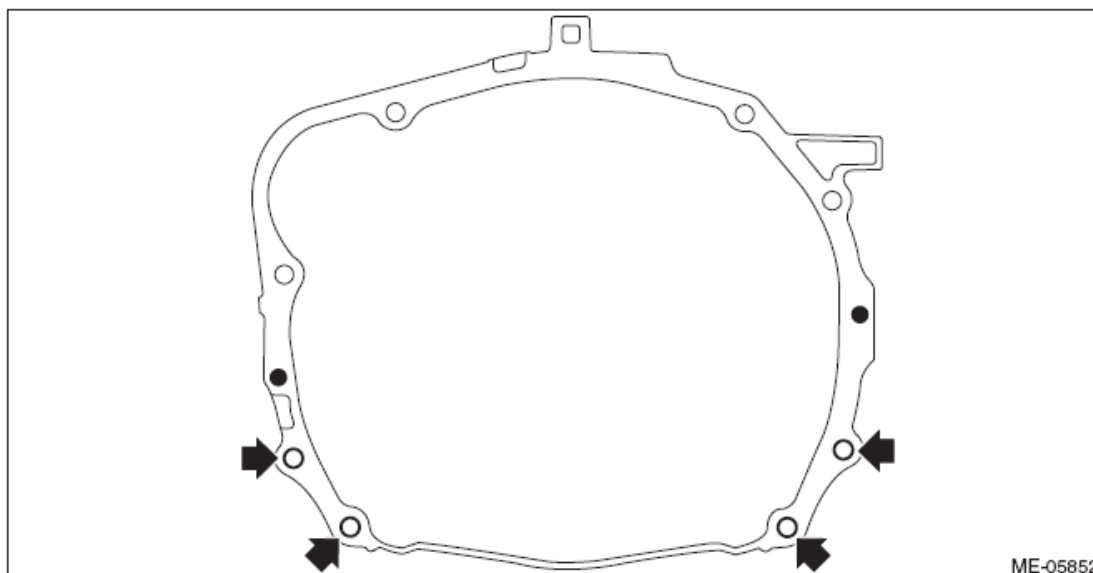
Locating Transmission Lower Side Nut And Bolt (CVT Model)
